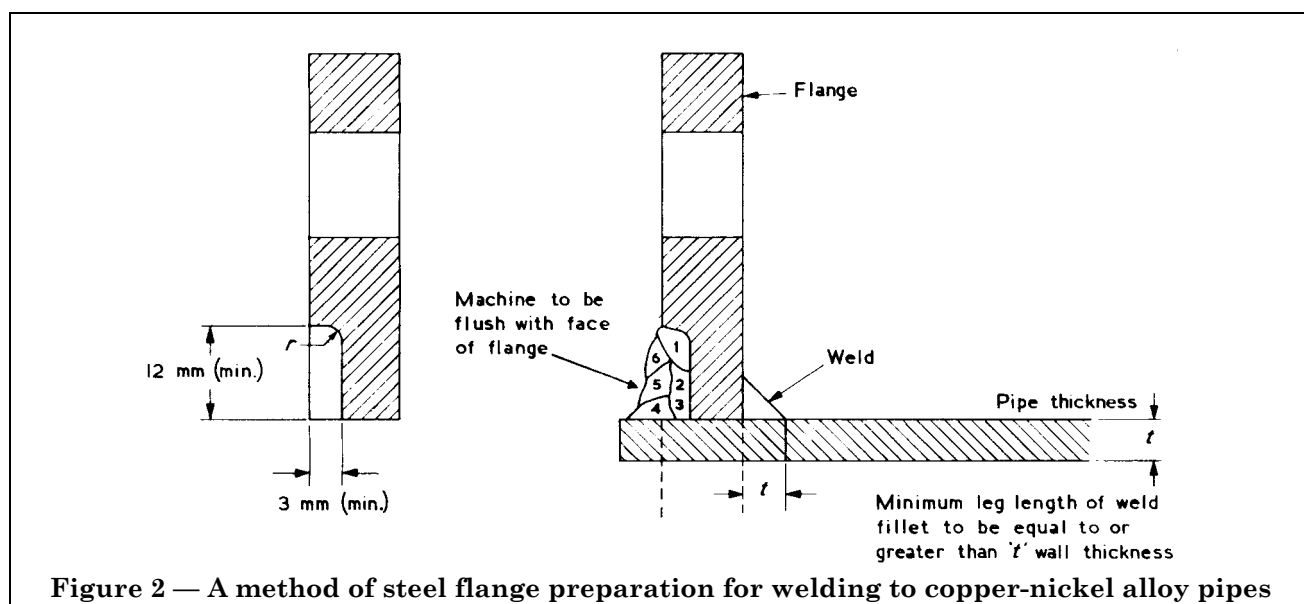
A method of steel flange preparation for welding to copper-nickel alloy pipes
